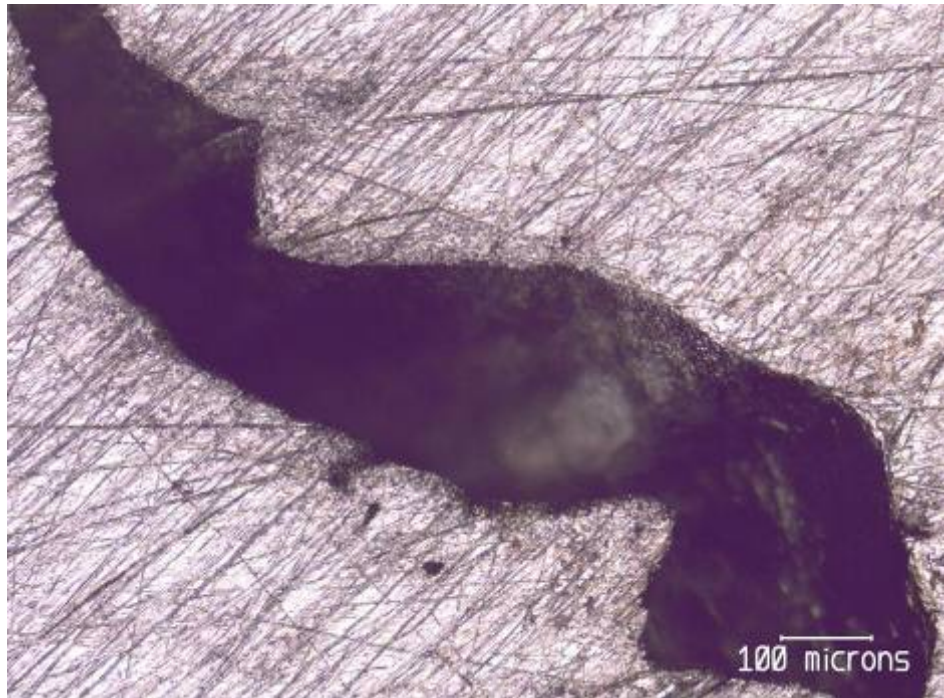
Cavity in welded Alloy 625 coupon.
